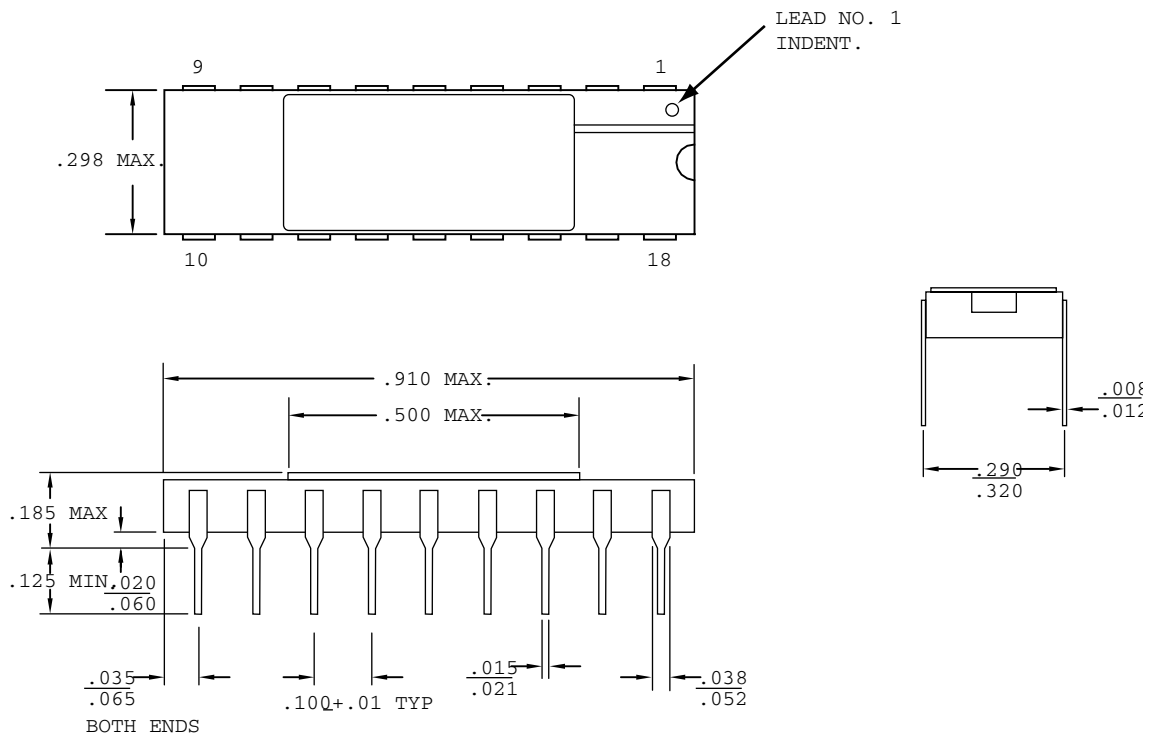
18-Lead Ceramic Sidebrazed Dual In-Line Package
